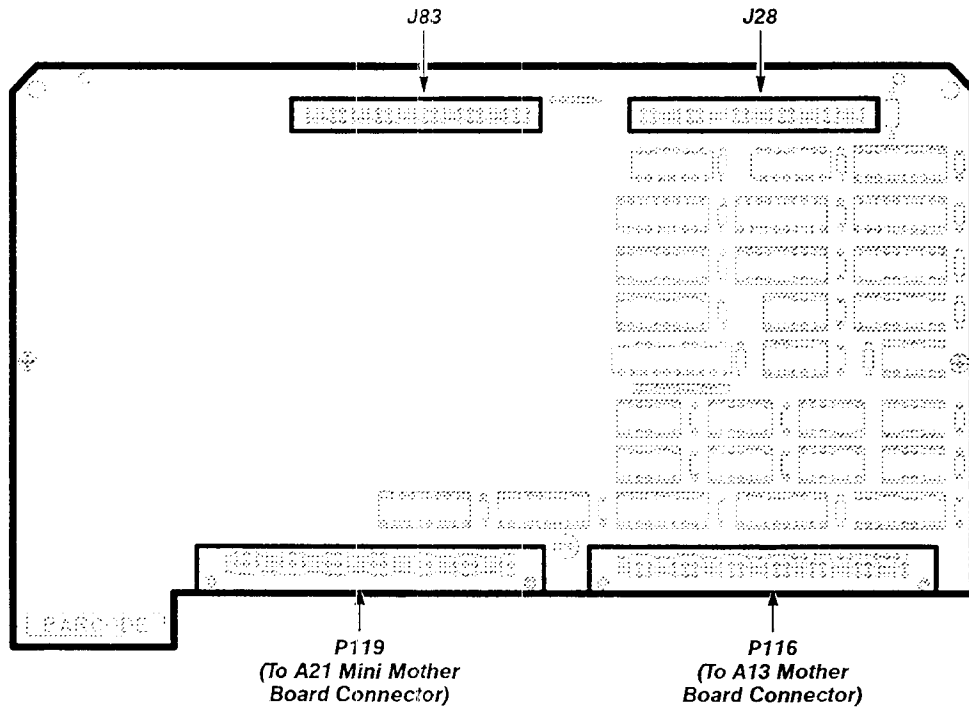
Removing/Replacing the A20 Digitizer I/O Board
